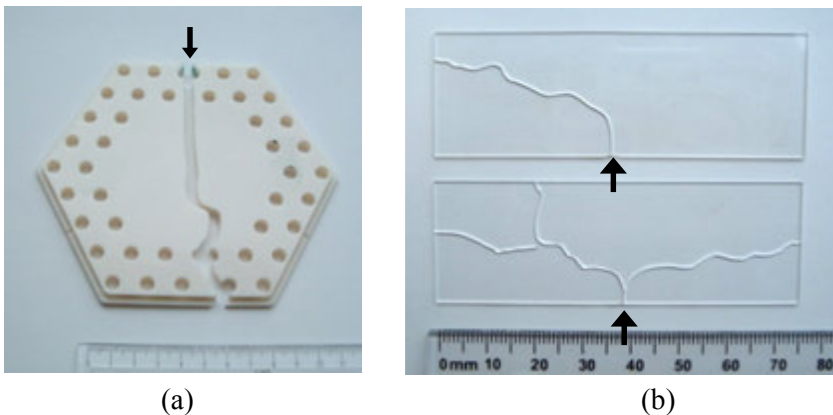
Thermal fractures with origin marked by arrows. (a) shows an alumina furnace baffle plate. Fracture started from grinding cracks associated with a hole. (b) shows glass slides broken by simply heating them on a hot plate.
